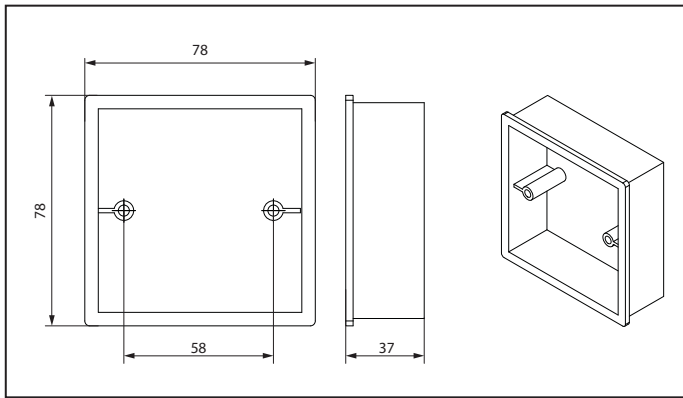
Overall dimensions of the mounting box for wall flush mounting
